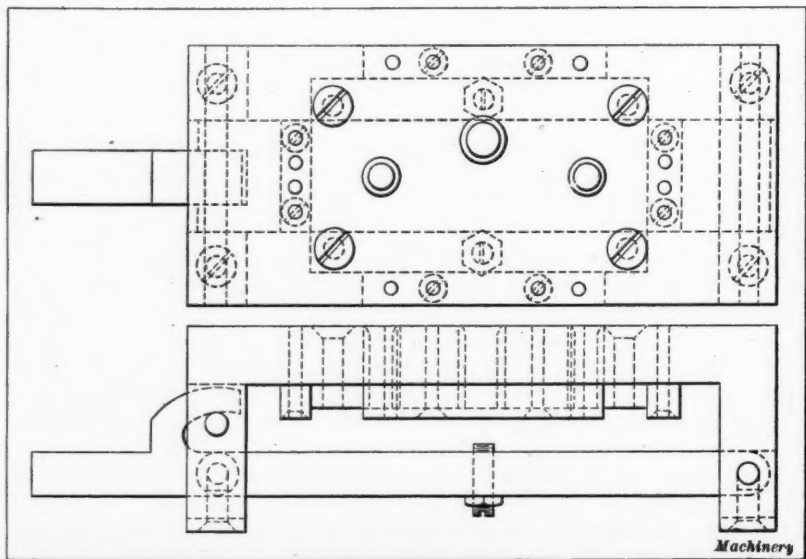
Jig Suitable for making Large Number of Pieces like that shown in Fig. 8
